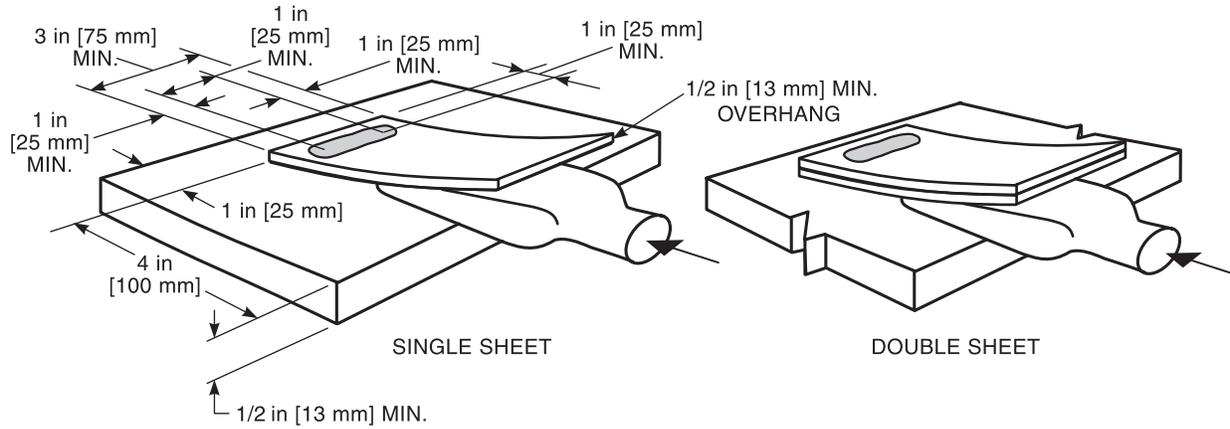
A—Test for Sheet to Supporting Structural Member Arc Seam Welds [see 4.6.5.2(1)]
